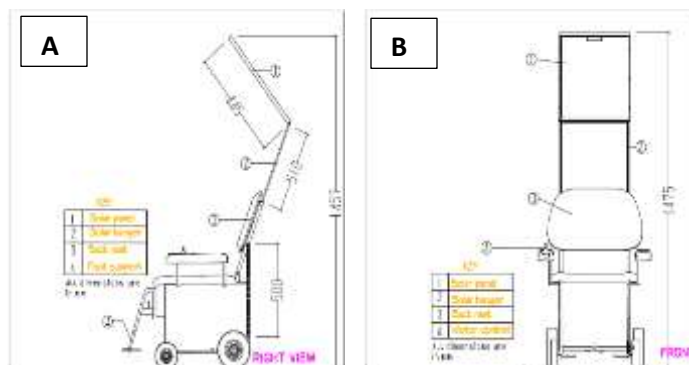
(a) Right Elevations of EDW, (b) Front Elevations of EDW
